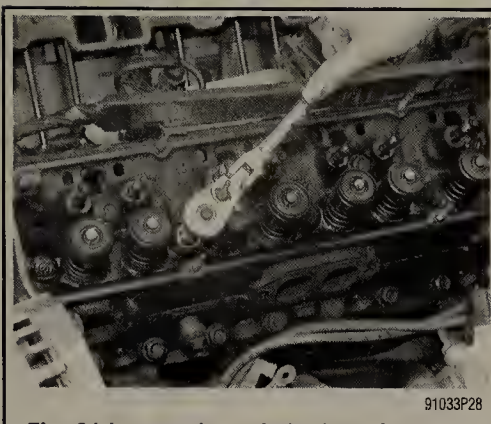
Loosen the cylinder head bolts gradually, starting from the inside and working out
